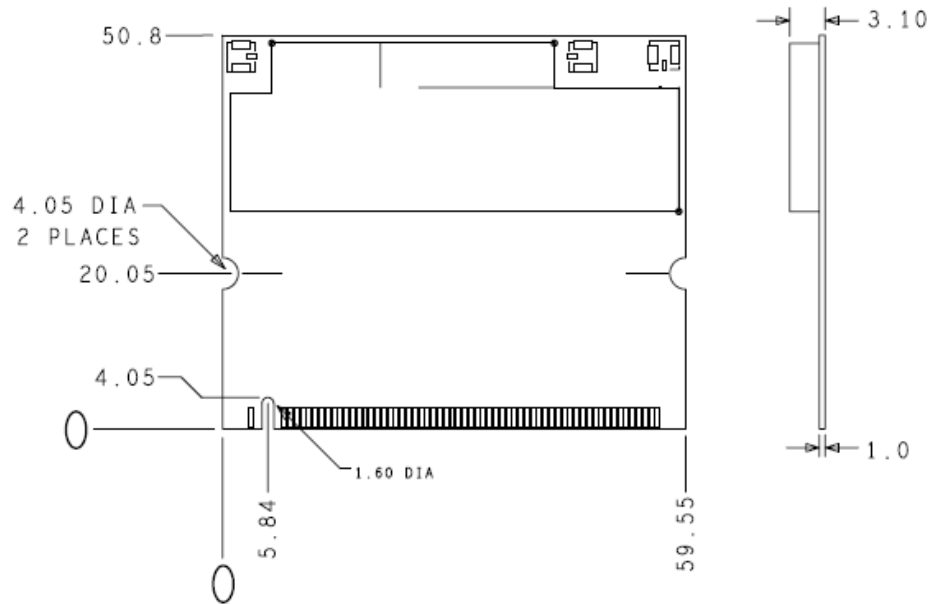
PCB and Shield Mechanical Drawing (dimensions in millimeters)
